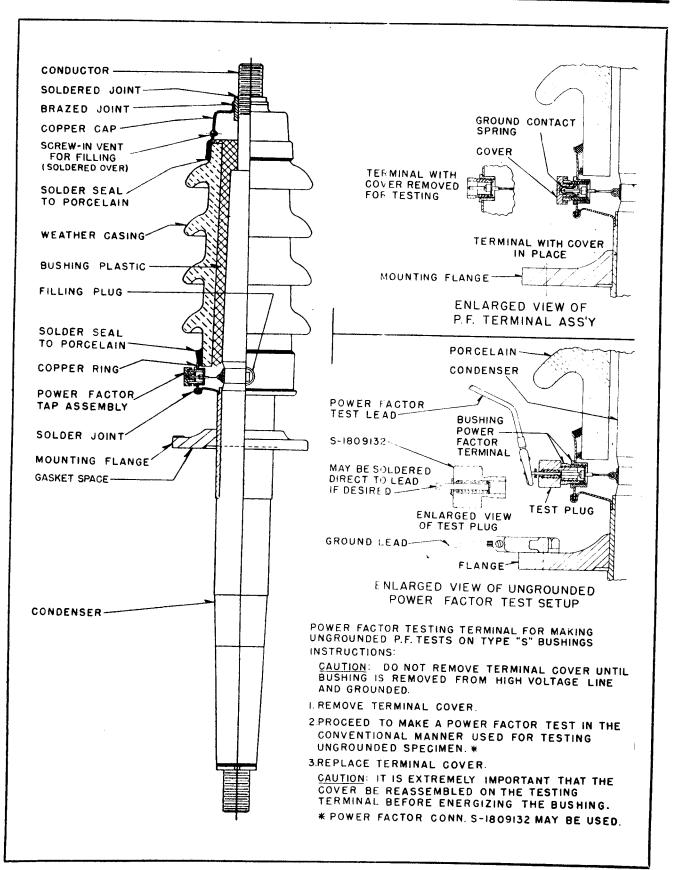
Cross Section of Outdoor Condenser Bushing, ASA Standard Type "S"
